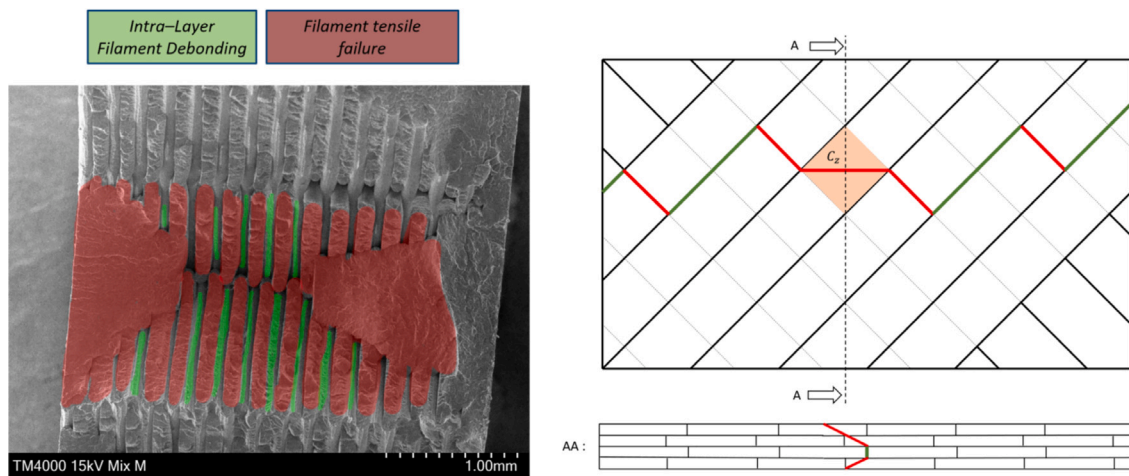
Failure analysis of the specimens printed at 45° with the 1 mm nozzle diameter & 0.1 mm layer height. (a) SEM fractography. (b) Frontal and (c) side schematics views of the crack path.
